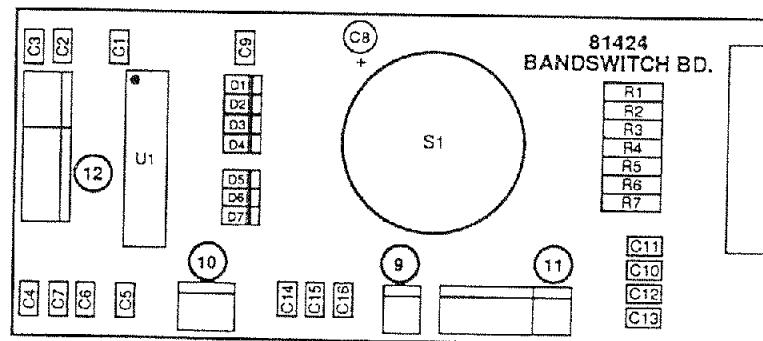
81424 BANDSWITCH BOARD COMPONENT LAYOUT
